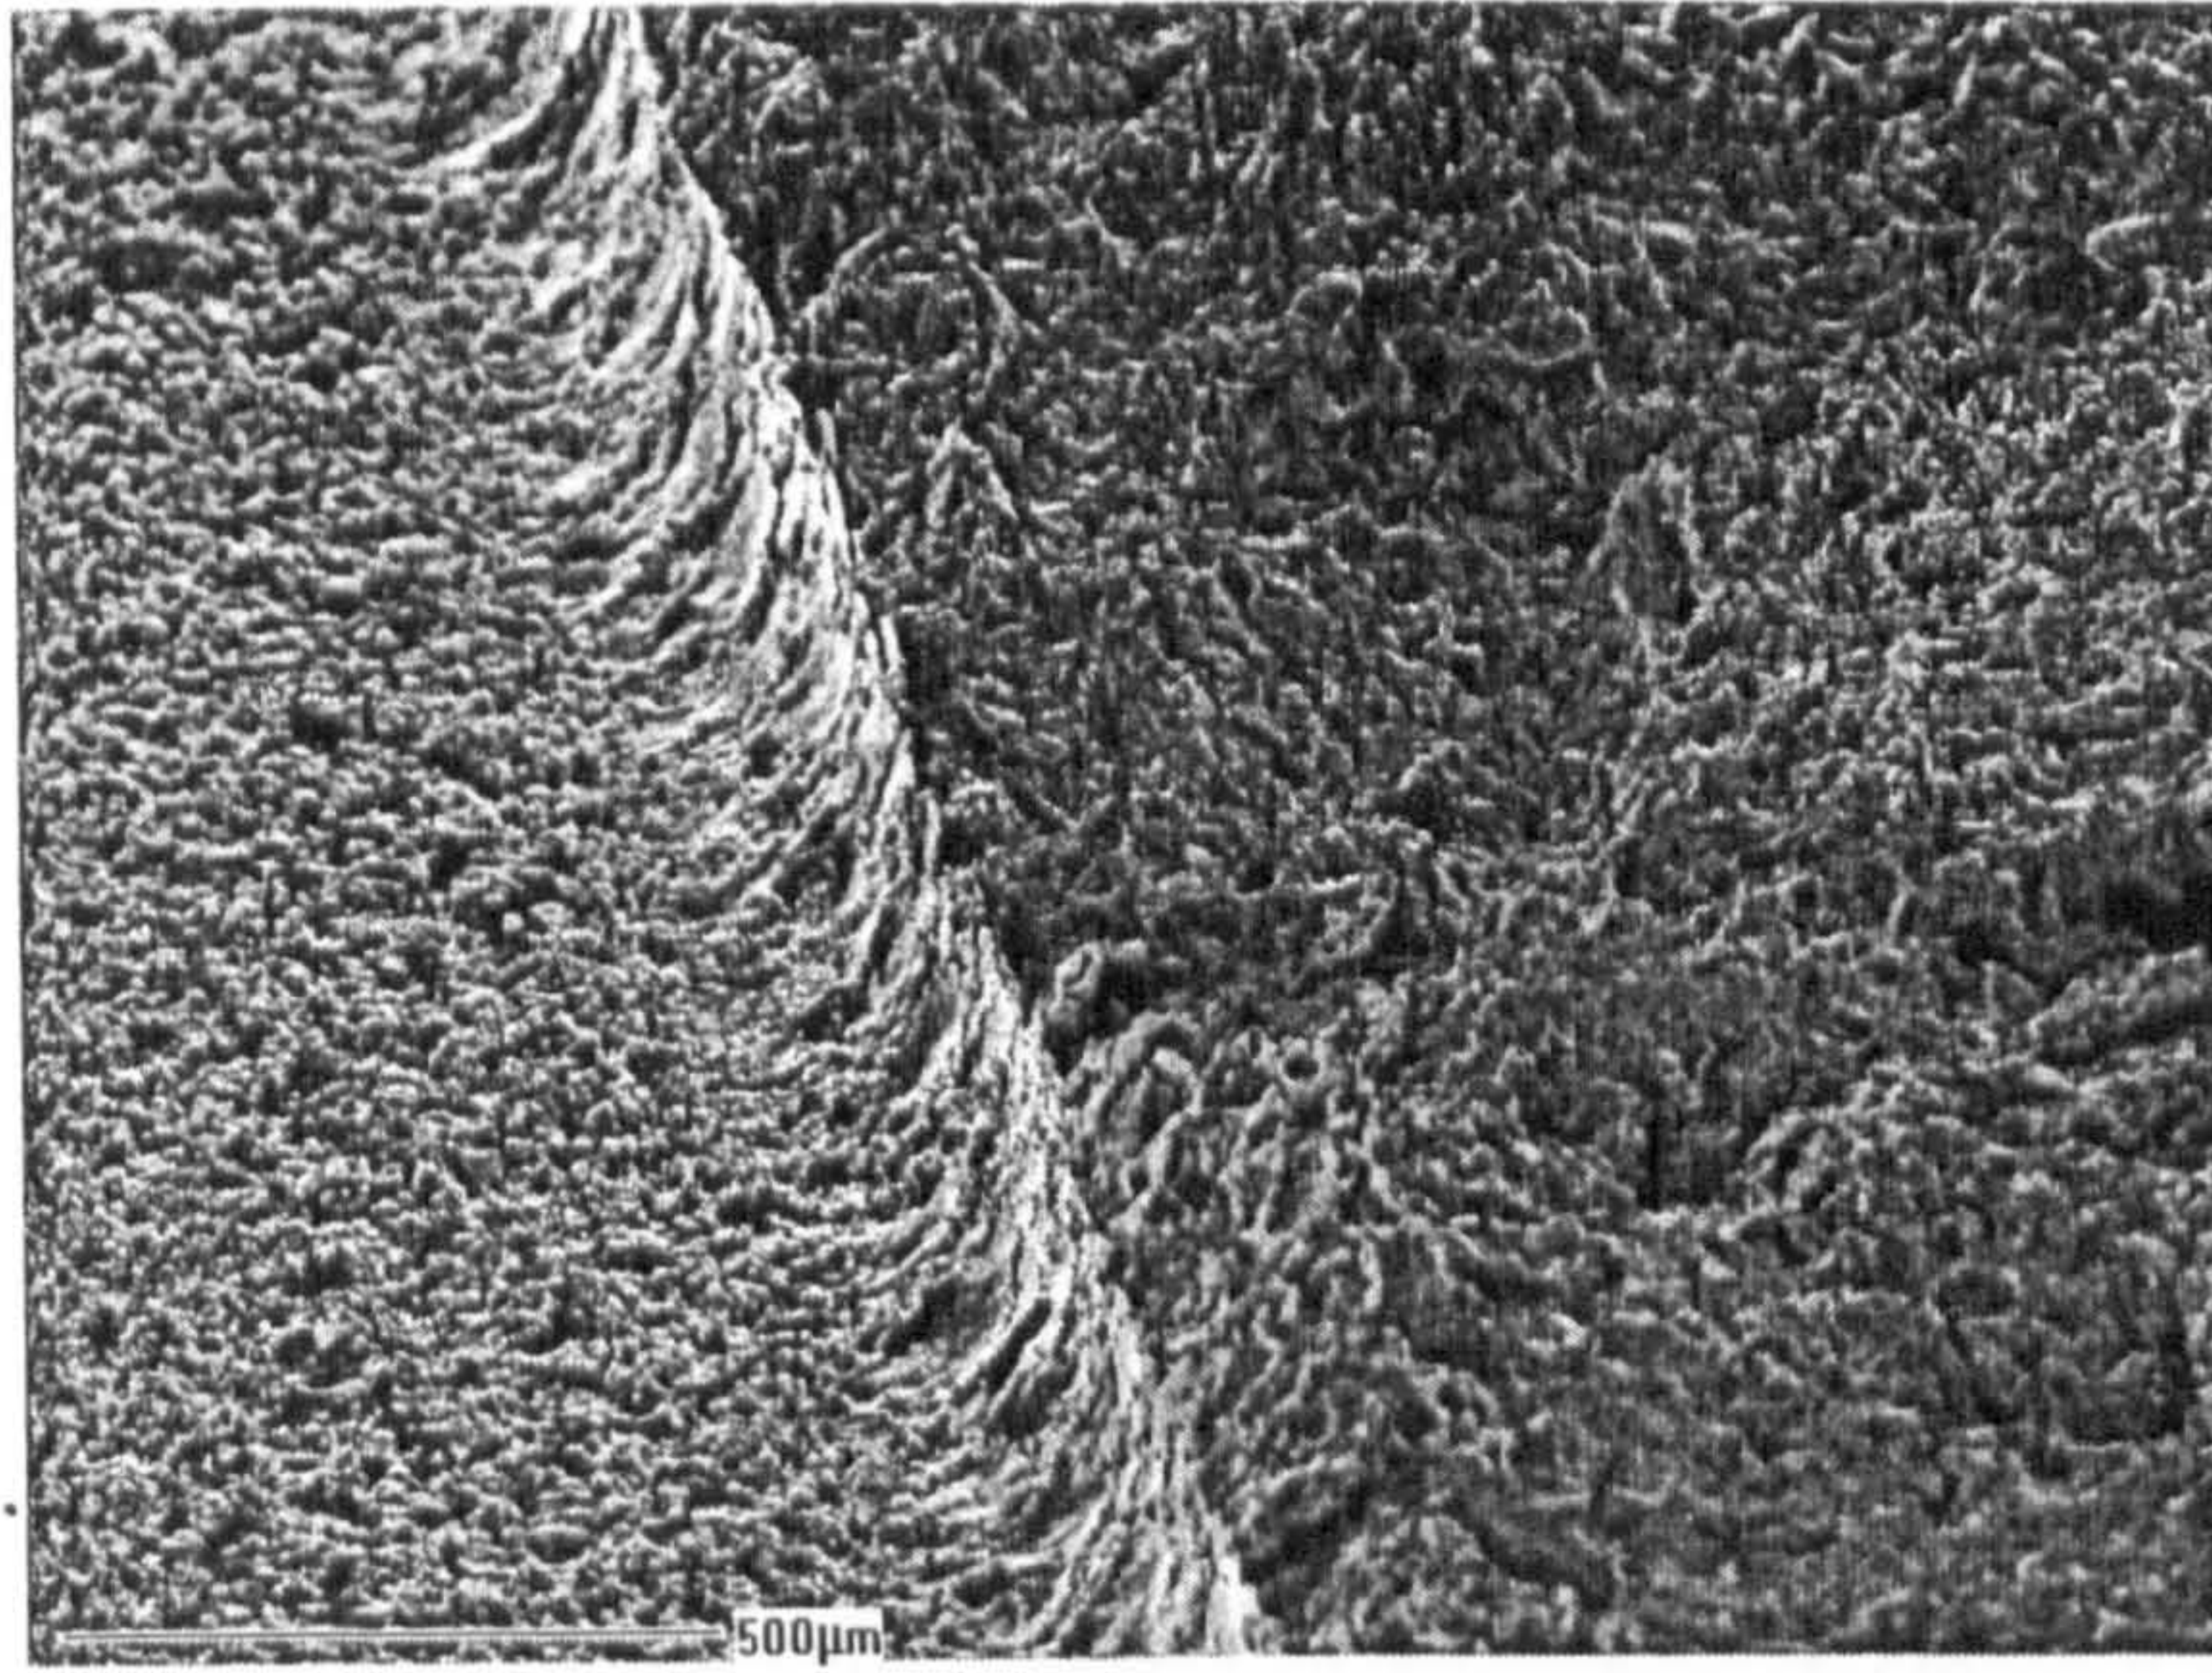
Fracture surface for as-recieved edm notched A533B showing brittle fracture initiation sites at tip
